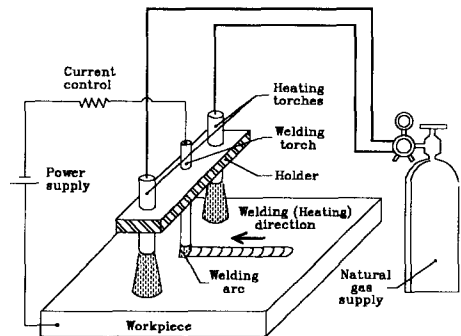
Schematic illustration of the parallel heat welding process
